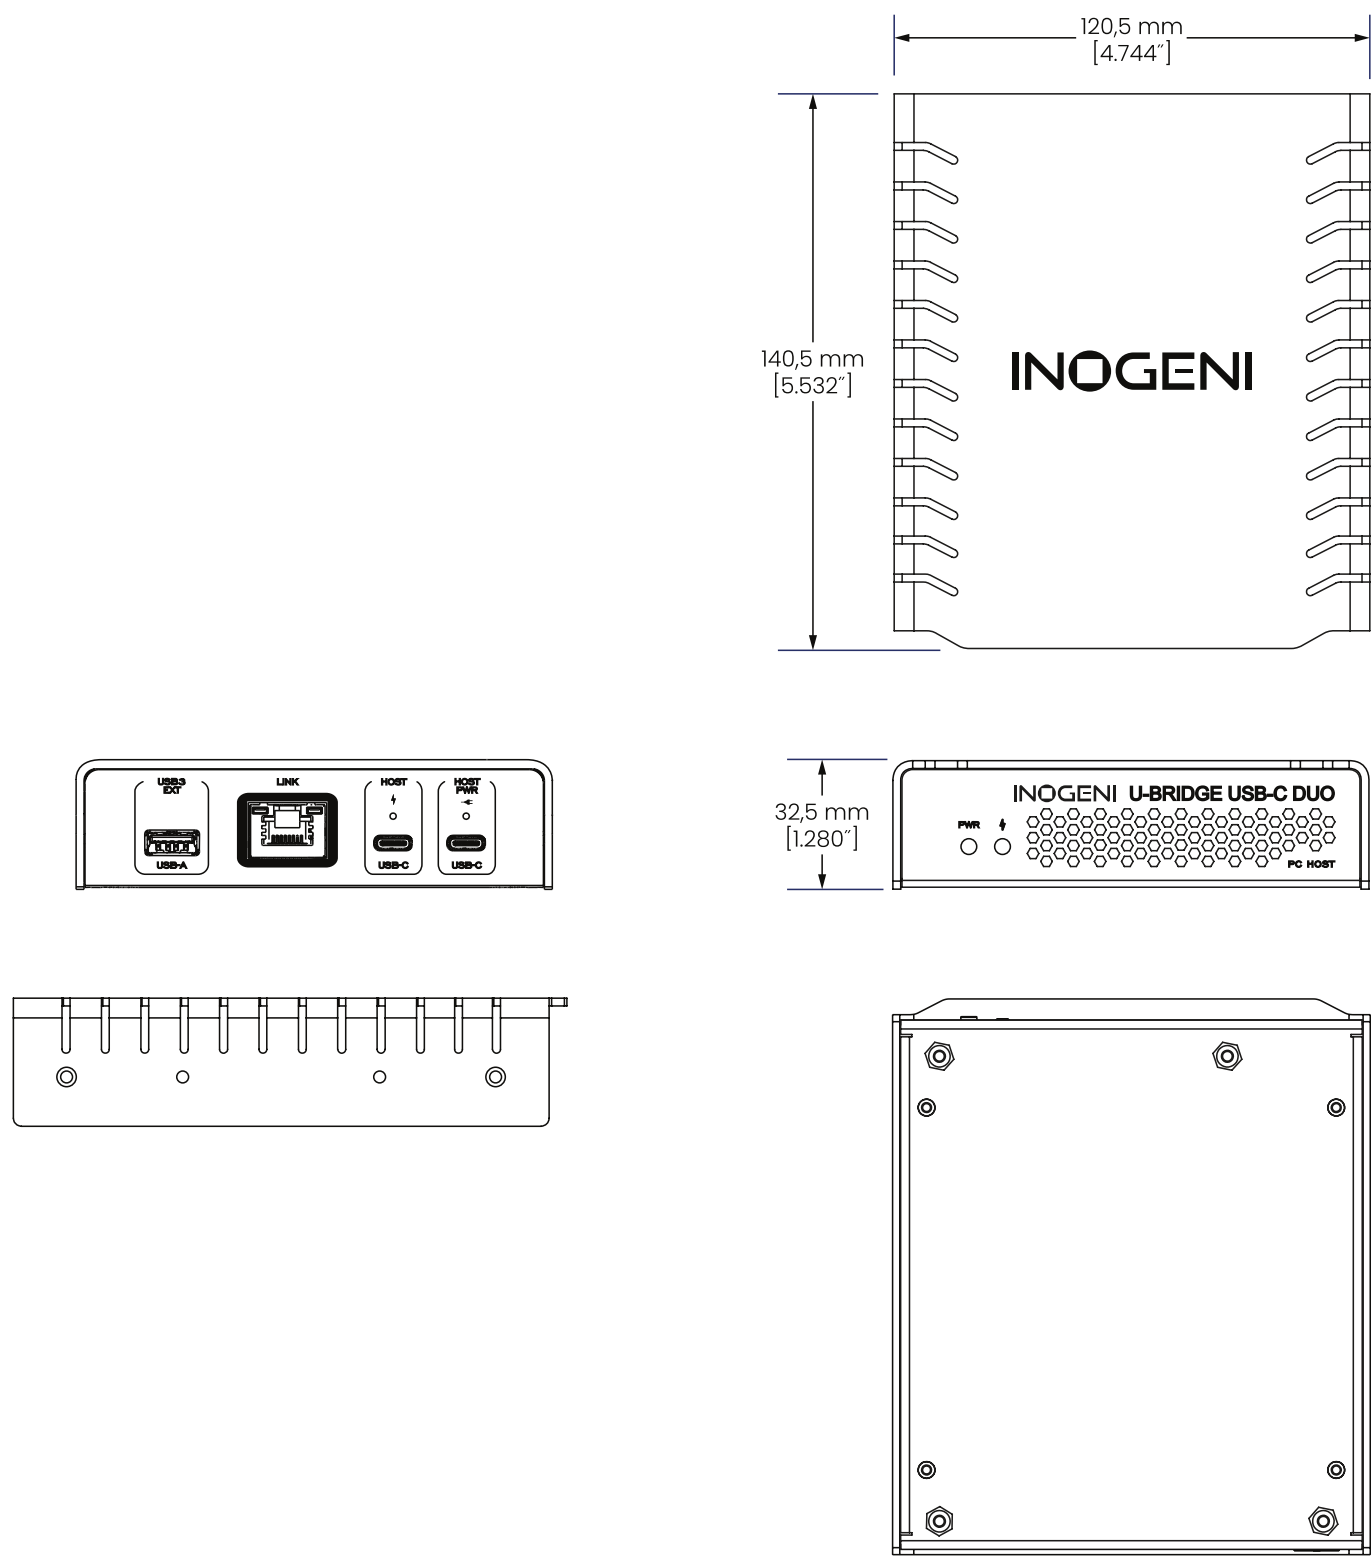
Bottom plate dimensions and holes positions of PC HOST hub – DUO variant
